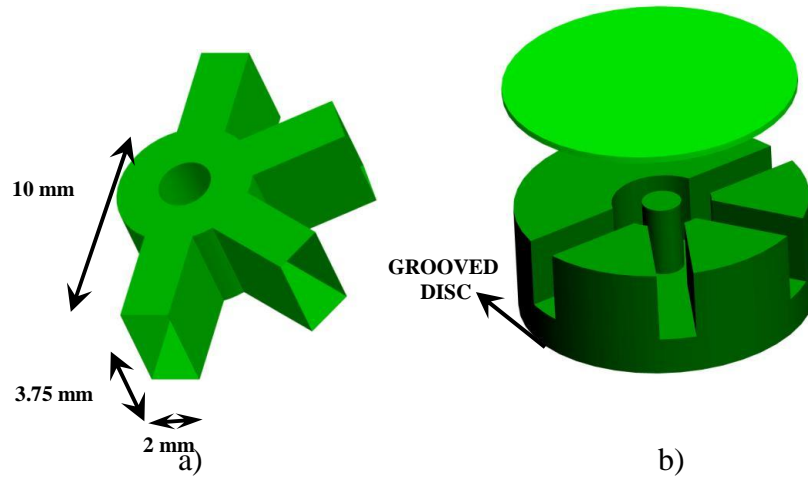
Multichannel millimeter waveguide design: a) original design and b) modified design for hot embossing.
